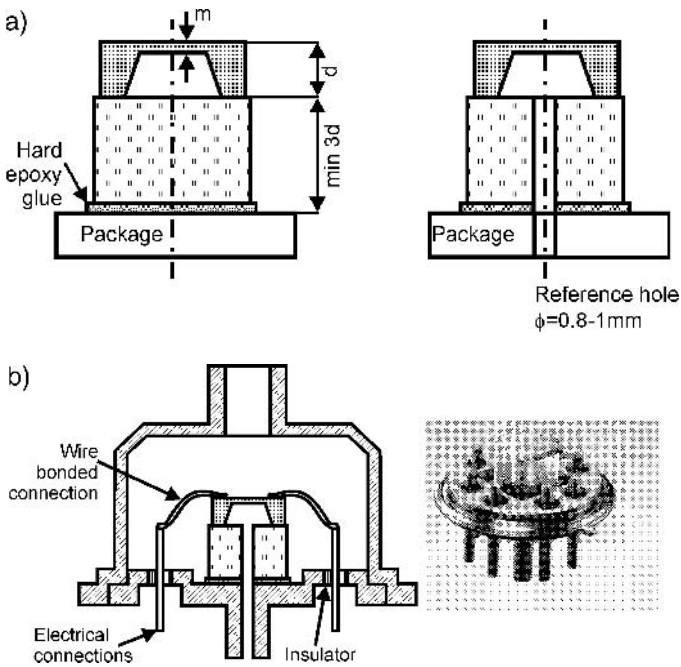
Assembly of piezoresistive pressure sensors: a) structure on glass – half section, absolute sensor on the left, relative sensor on the right, b) structure on glass in the TO5 package.
